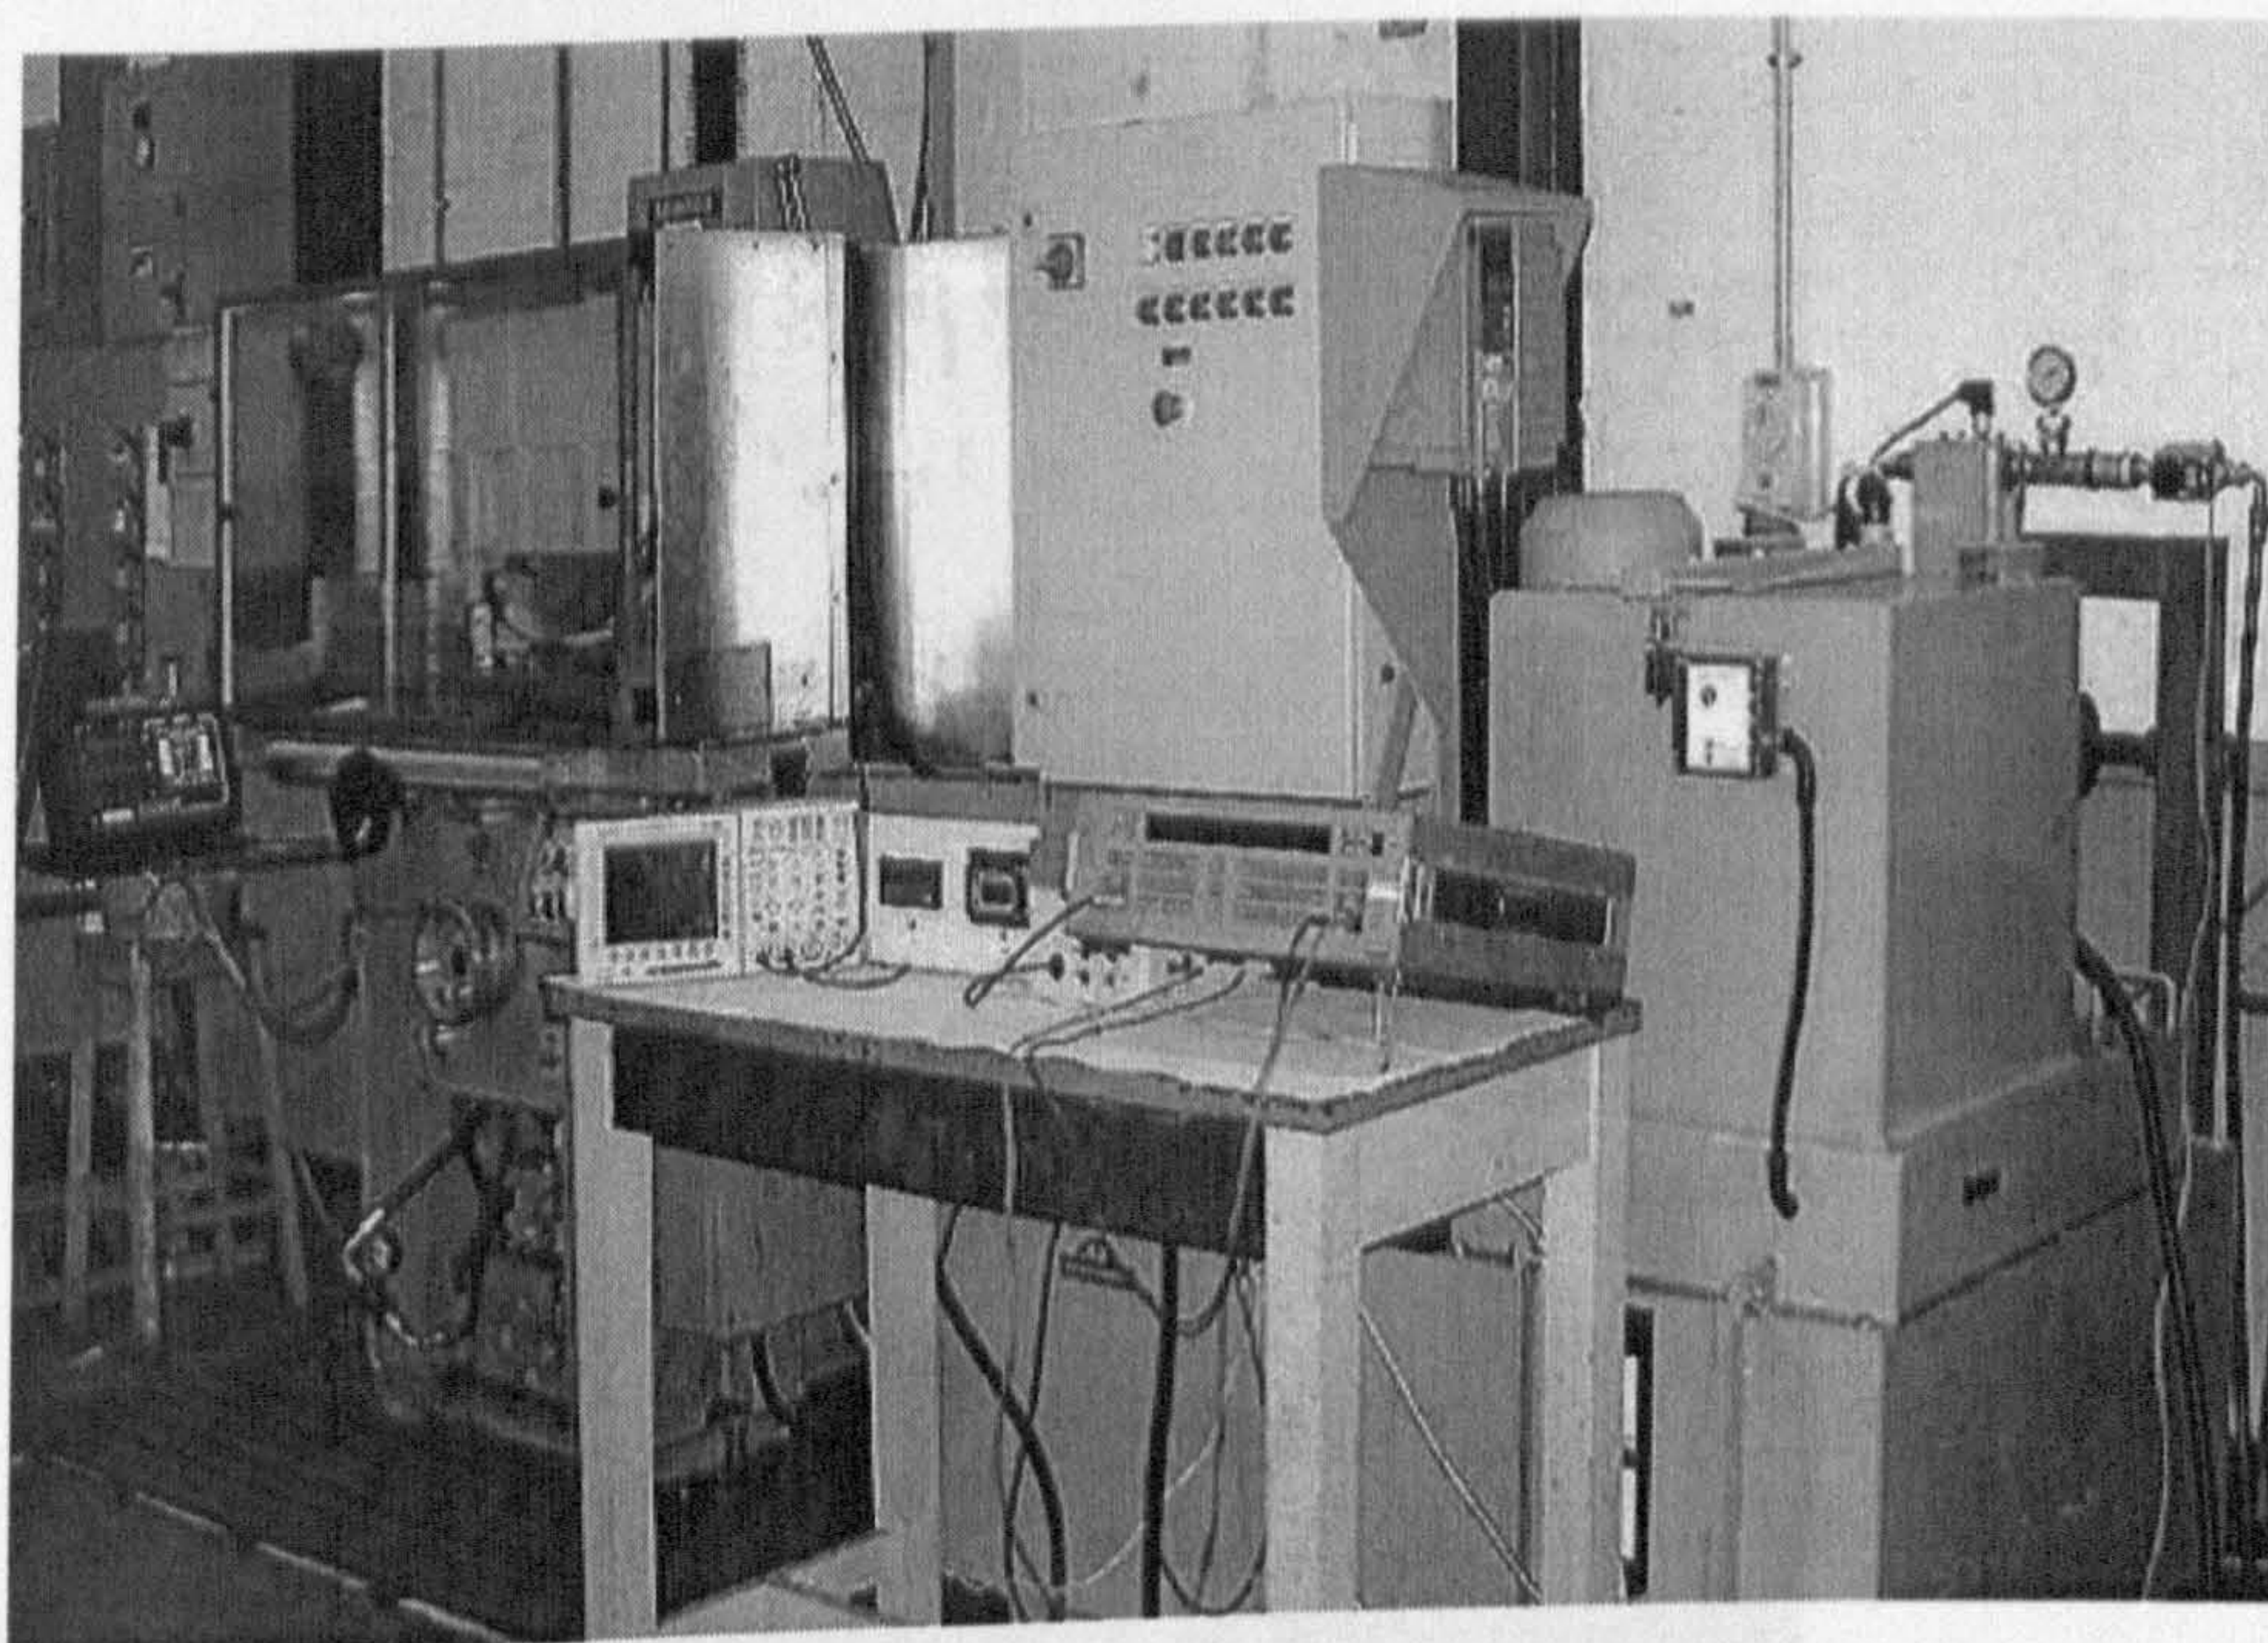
Abwood Series 5020 surface grinding machine and high flowrate fluid delivery system.
